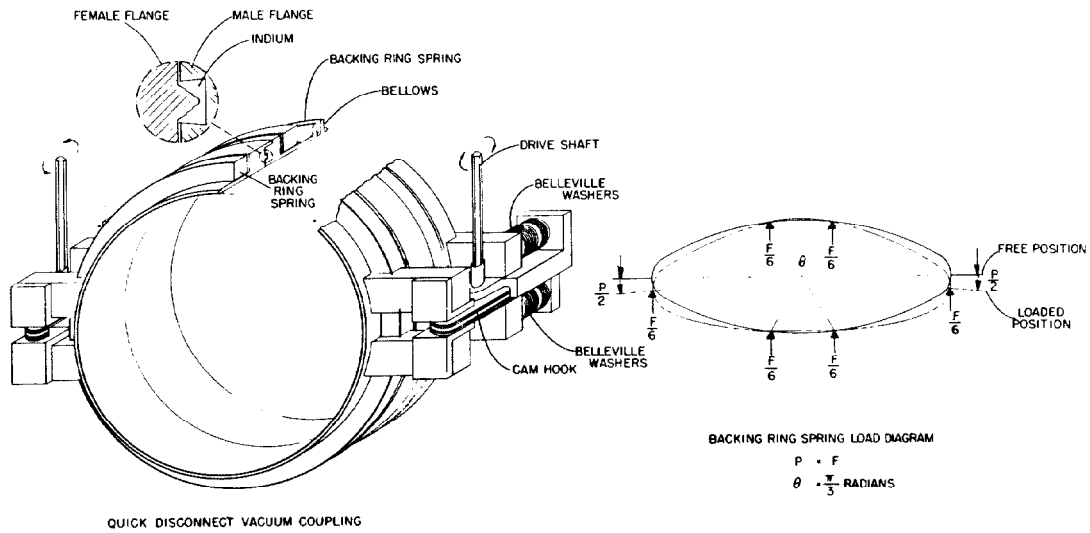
Cross-section view of quick-disconnect vacuum coupling.
